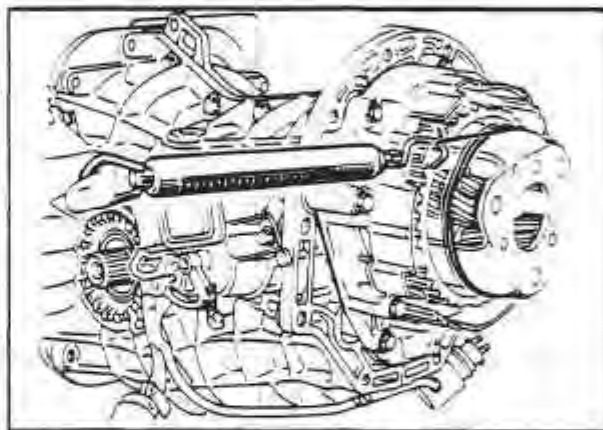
BEARING PRE-LOAD ADJUSTMENT
